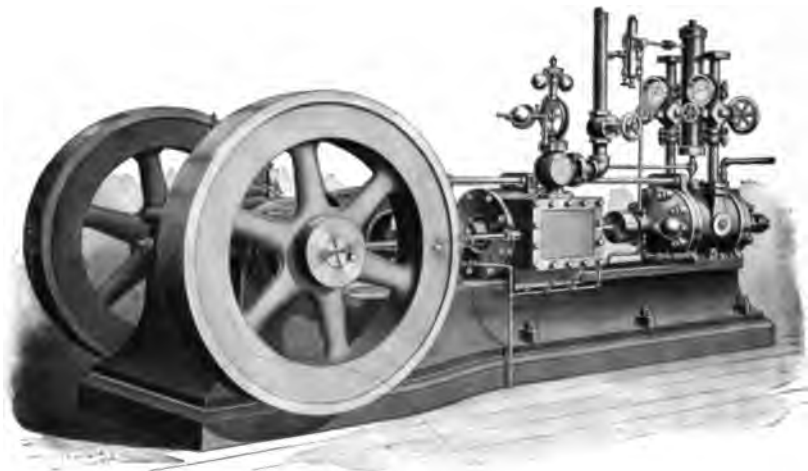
PENNEY'S HORIZONTAL DOUBLE-ACTING COMPRESSOR,
